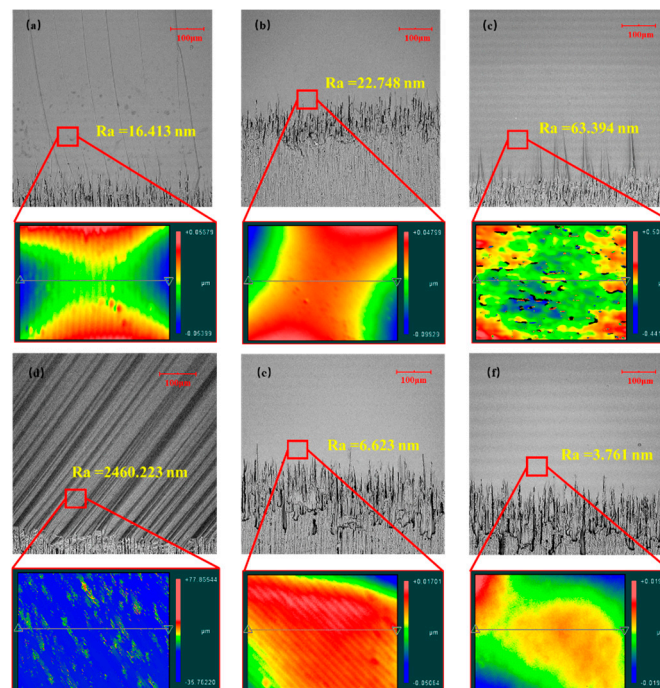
The roughness of the fracture section. (a) Test 1-M-A; (b) Test 2-M-C; (c) Test 3-C-M; (d) Test 4-C-A; (e) Test 5-A-C; (f) Test 6-A-M.
